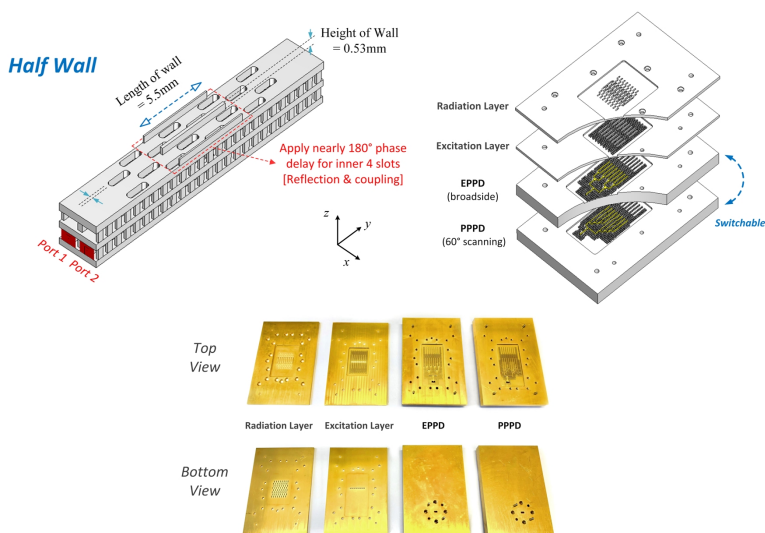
GWG Slot Array incorporated with half wall decoupling structure.
